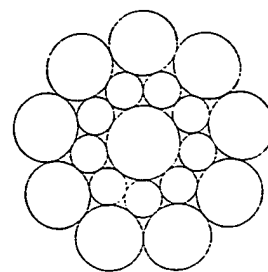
Cross section of a cross lay type strand (12-6+1) wires
